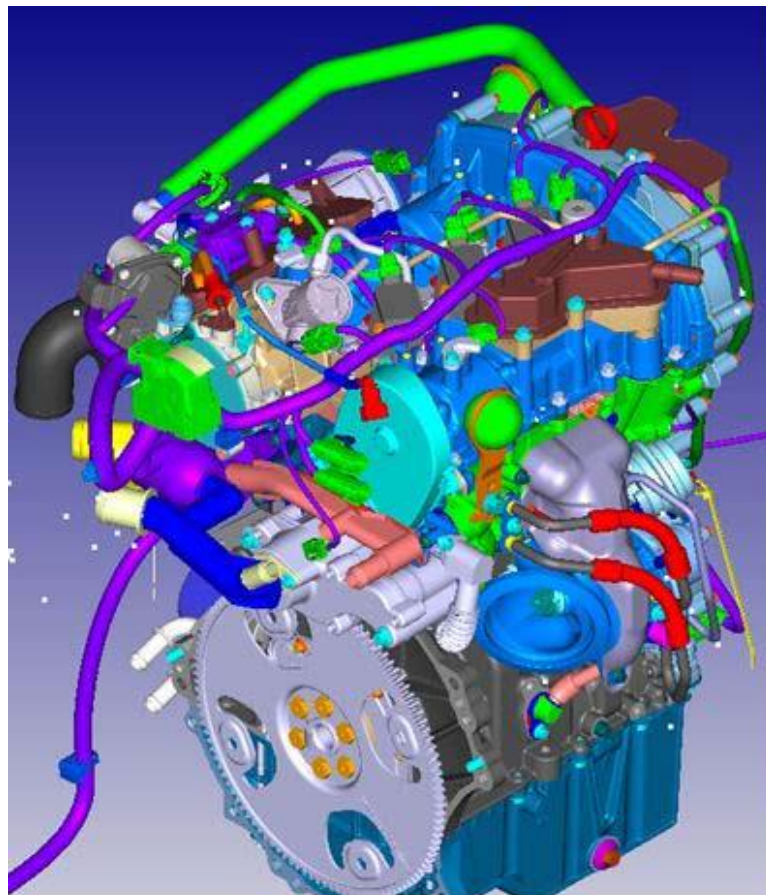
3D CAD Drawing of the engine (courtesy of Ford Motor Co)
